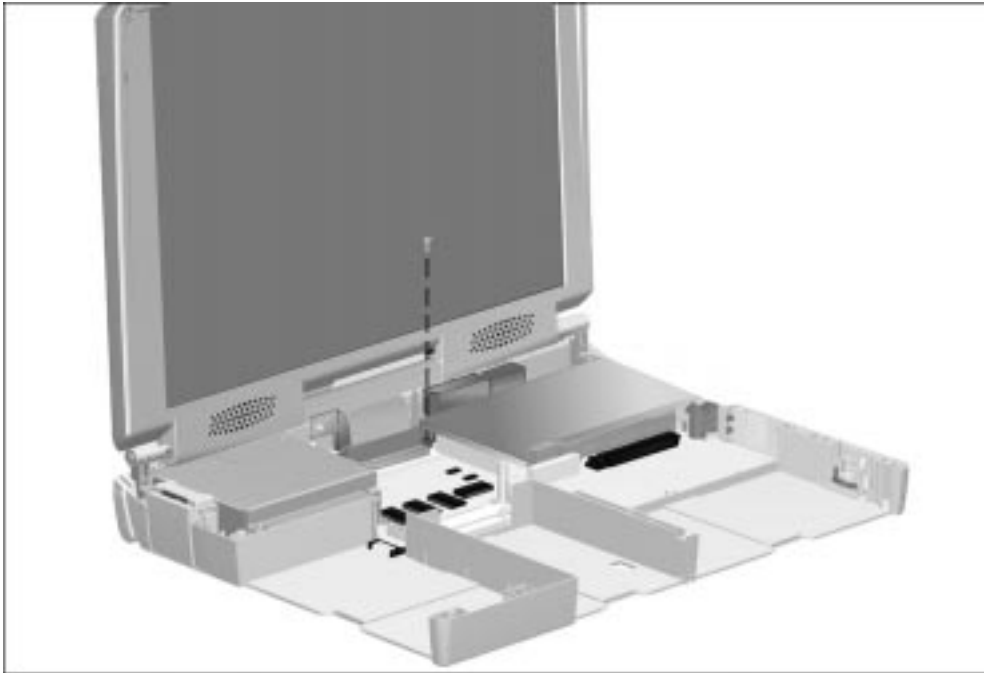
Removing the Display Video Cable Connector Screws
